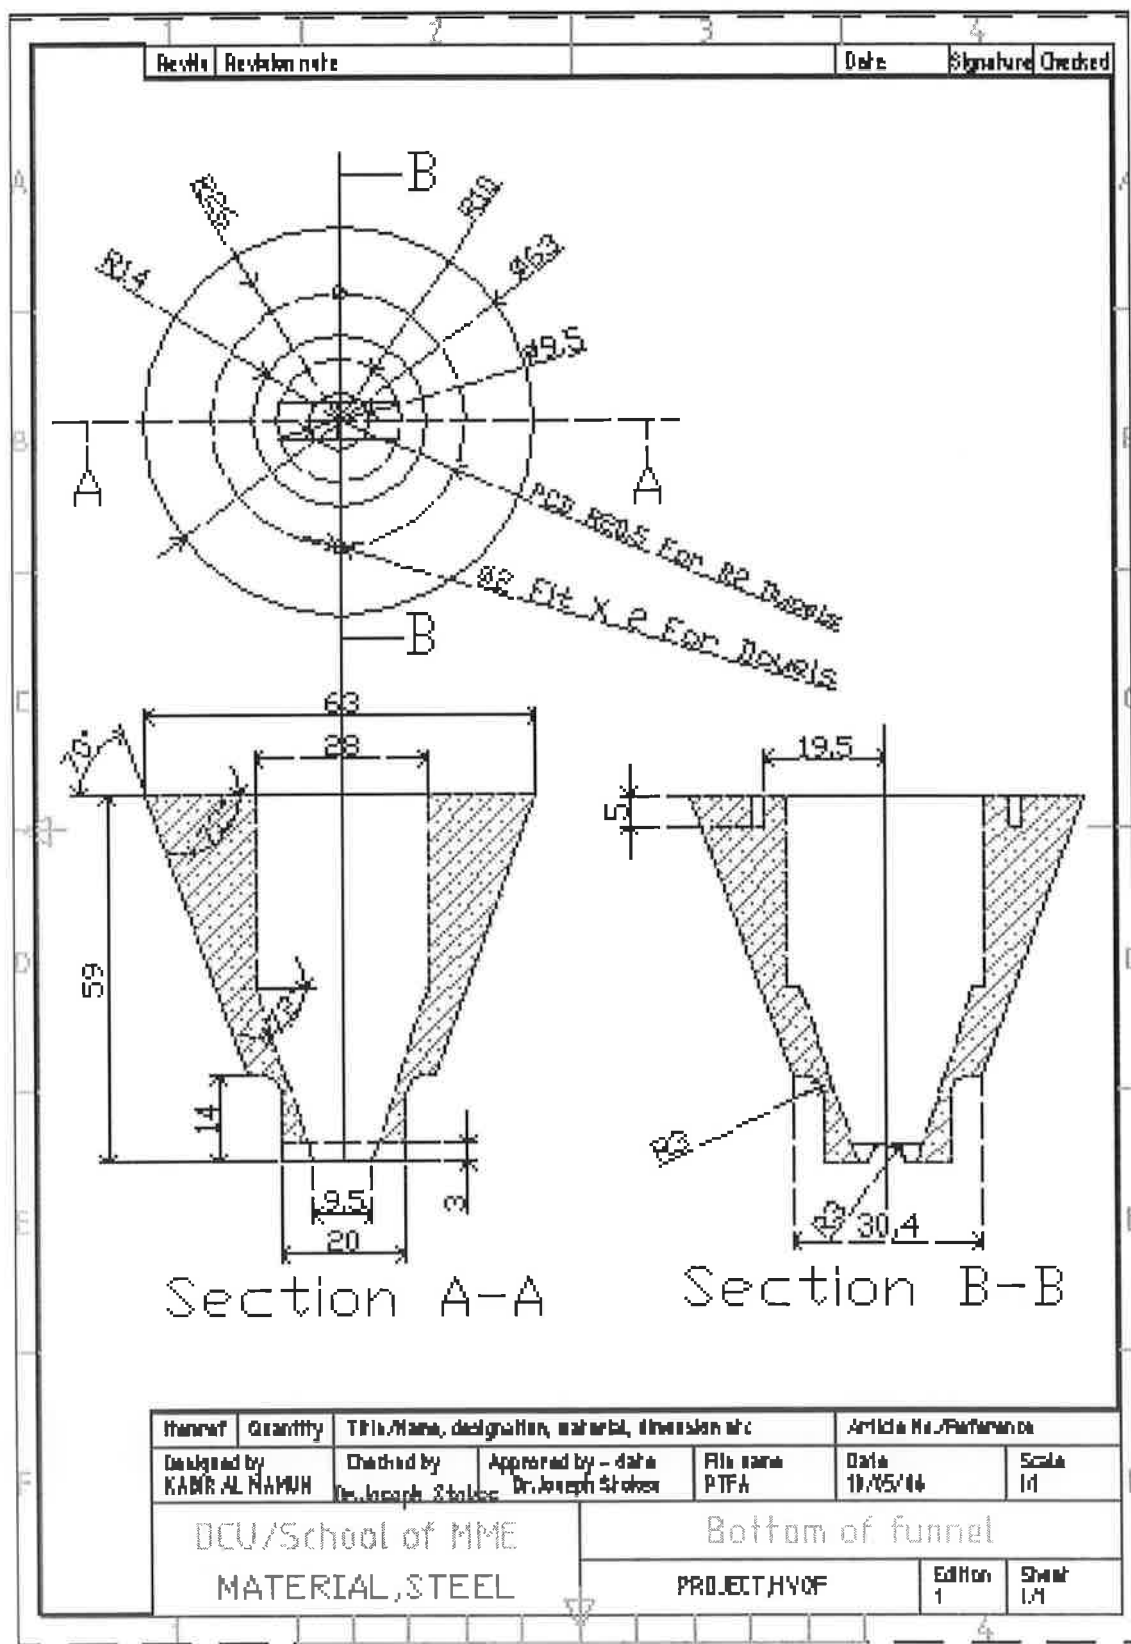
Schematic drawing of the bottom part of the funnel shaped mixing zone.
